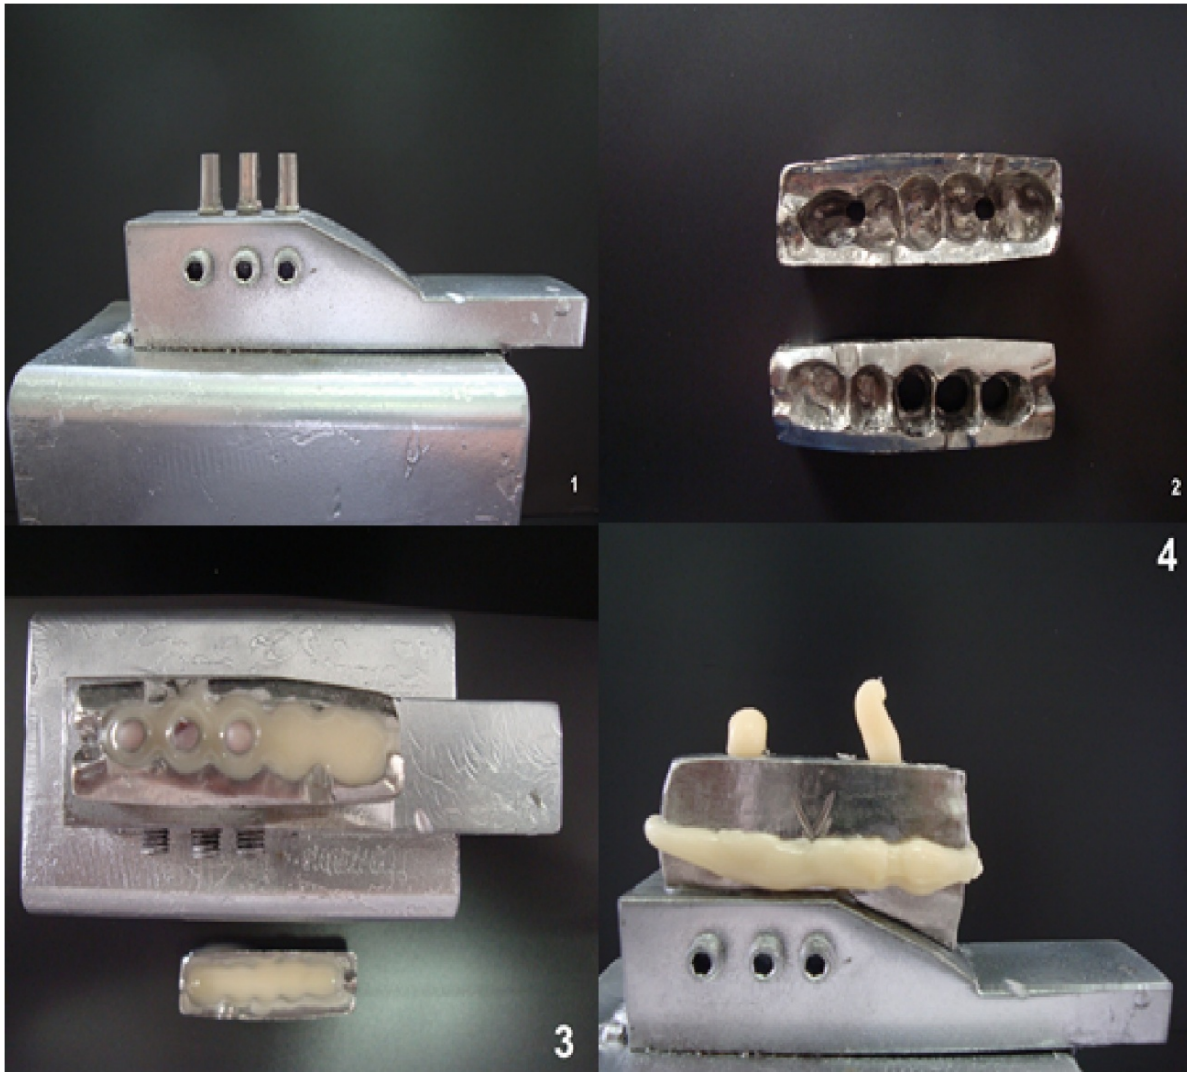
1. Metallic mould I used as support for the production of specimens and tests in universal testing machine (EMIC); 2. Metallic mould II, top and bottom, used for production of standard specimens; 3. Acrylic resin inclusion in the upper and lower portion of the metallic mould II in position on the metallic mould I; 4. Top positioned on the bottom of the metallic mould II when reaching the plastic phase.
